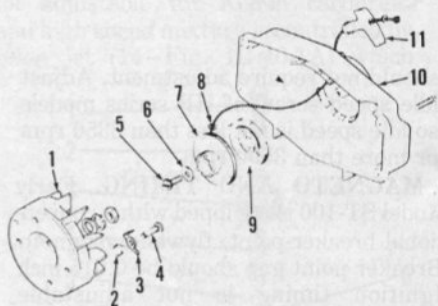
Exploded view of rewind starter used on Models ST-80, ST-100 and ST-120.
